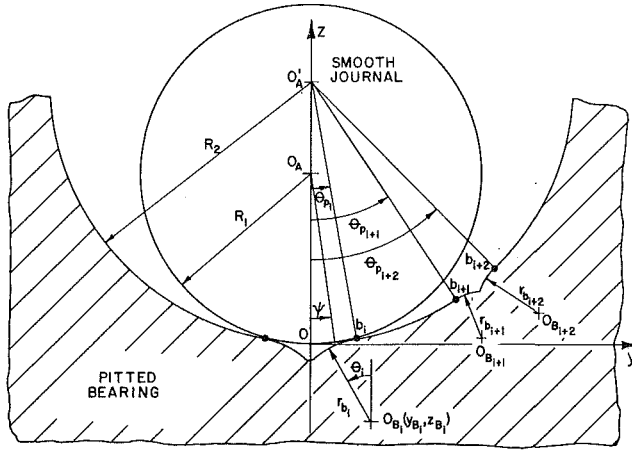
Coordinate systems for a smooth journal contacting a bearing with several longitudinal surface defects
